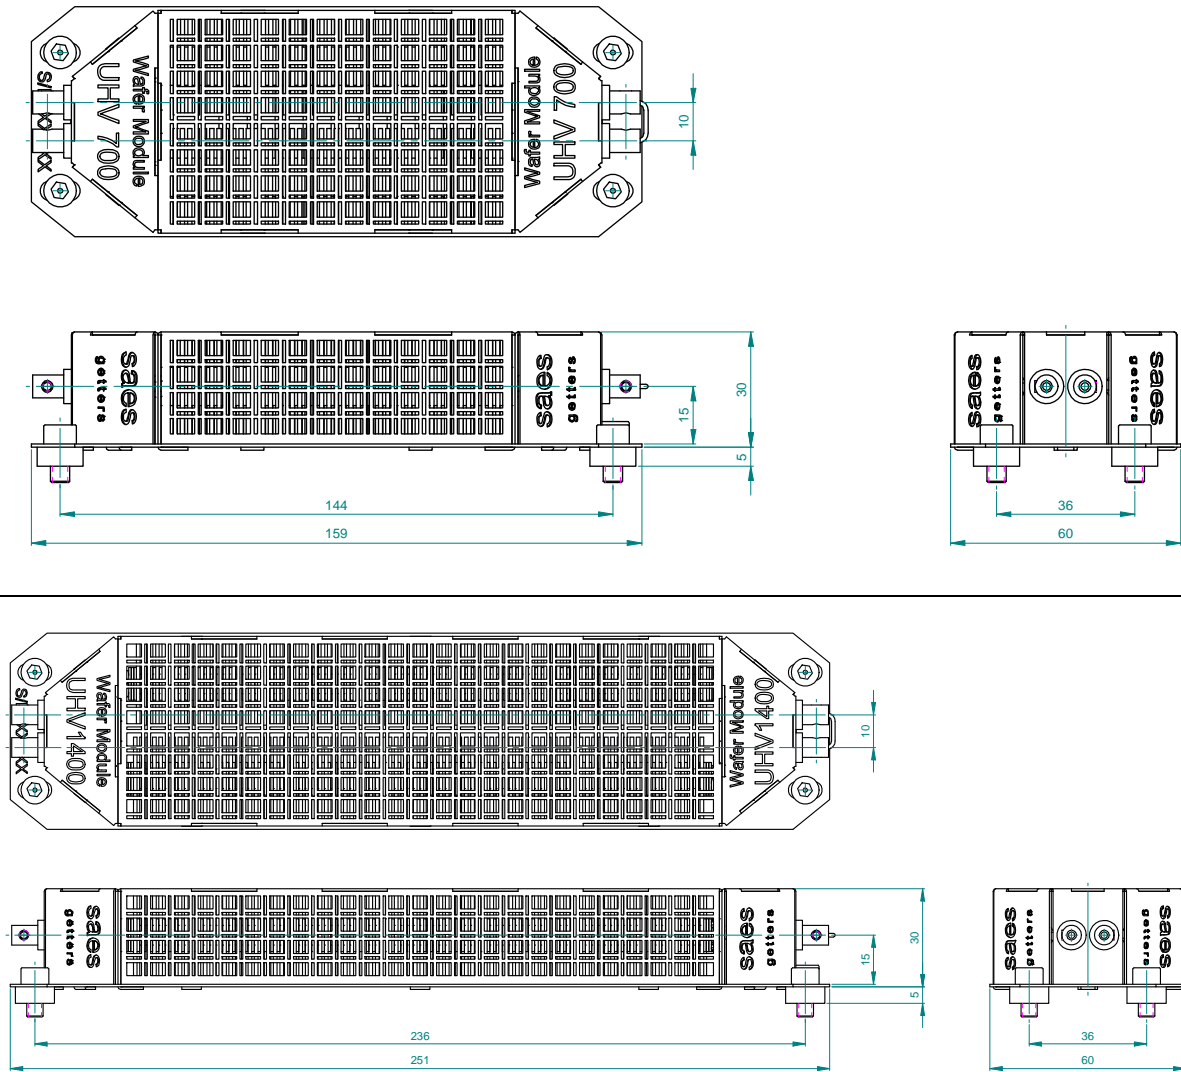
2D drawing of UHV 700 and UHV 1400 Wafer Module. All measures are in millimetres.
